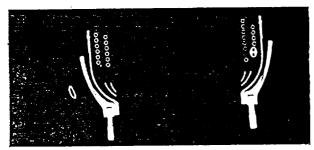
CT Slice Through SSME Heat Exchanger Assembly
